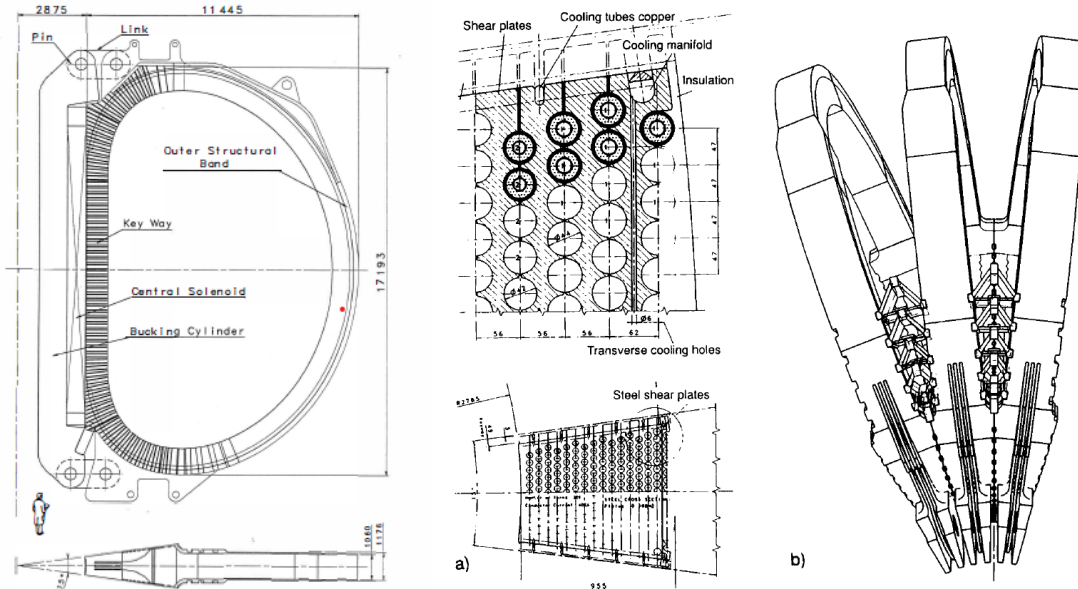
Left: Elevation View of TF Coil. Right: Detail, and Concept for the Mechanical Structure
